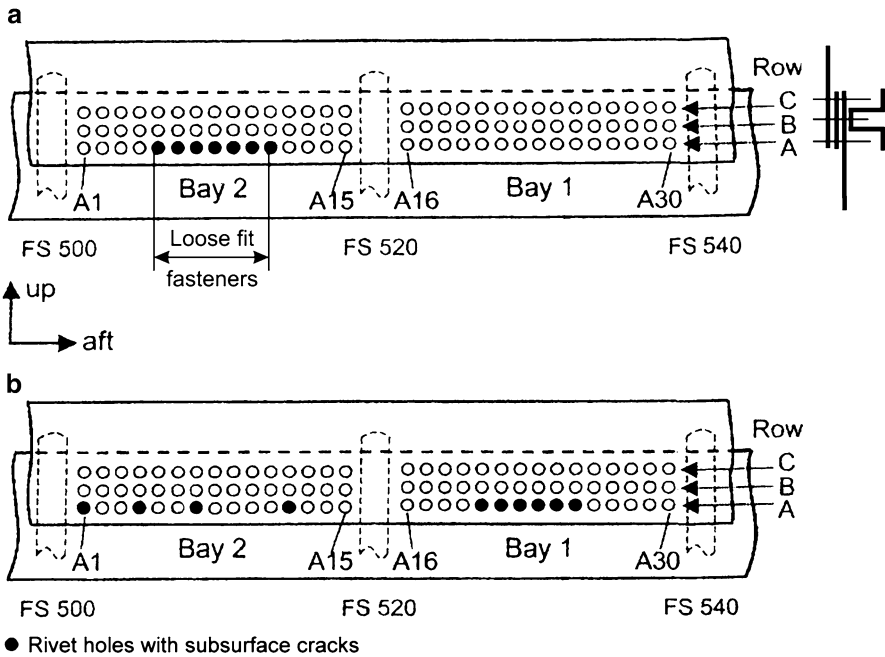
Damage scenario in a lap joint of the test panel (a) and rivet holes with subsurface fatigue cracks (b) (Bakuckas et al. 2007)
